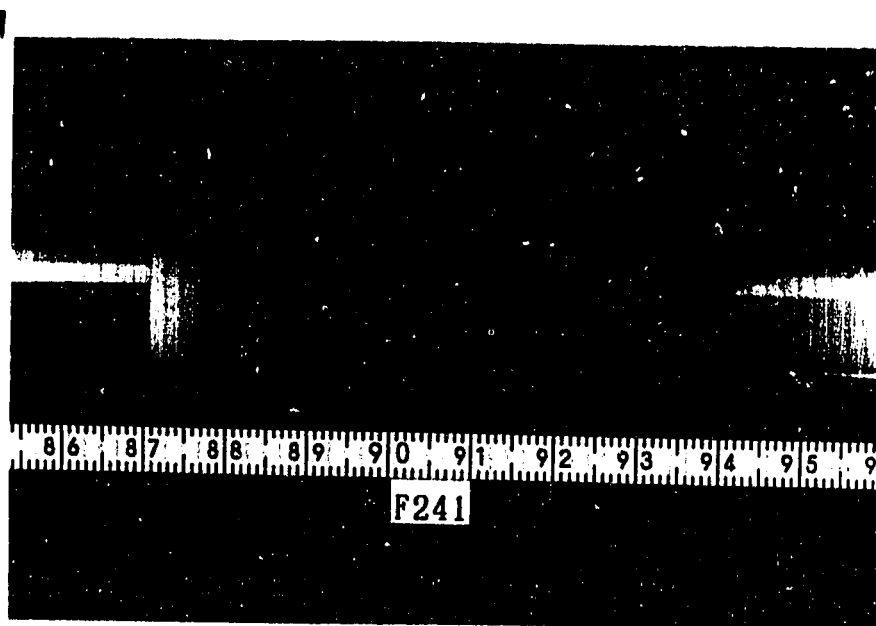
Appearance of fatigue test piece after failure - F241
